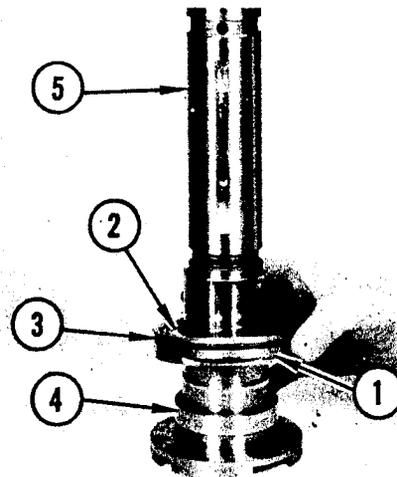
CLUTCH SHAFT DISASSEMBLY
